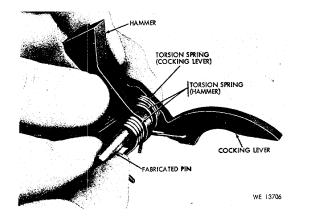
Using fabricated pin to assemble hammer, cocking lever, and allied parts.
